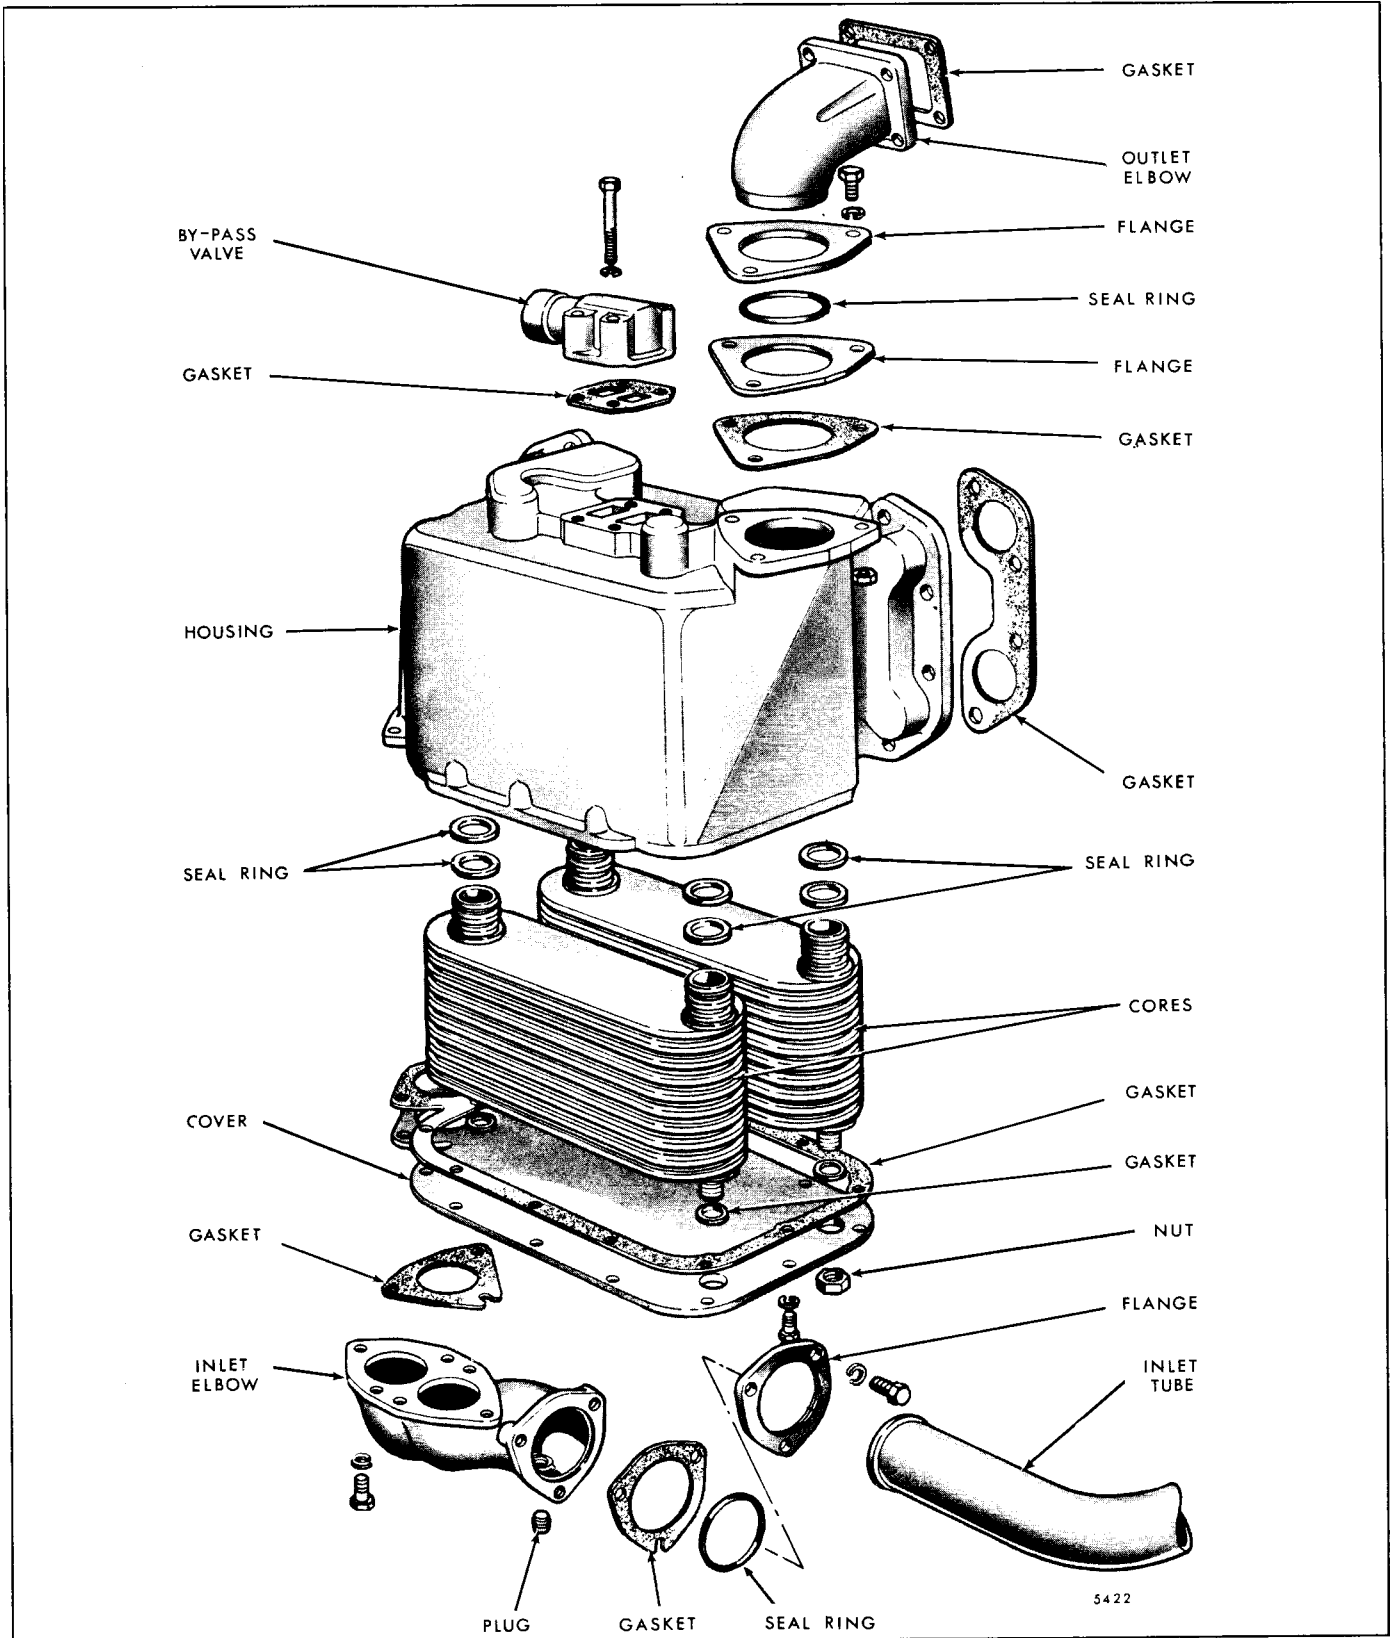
Lubricating Oil Cooler and Relative Location of Parts
